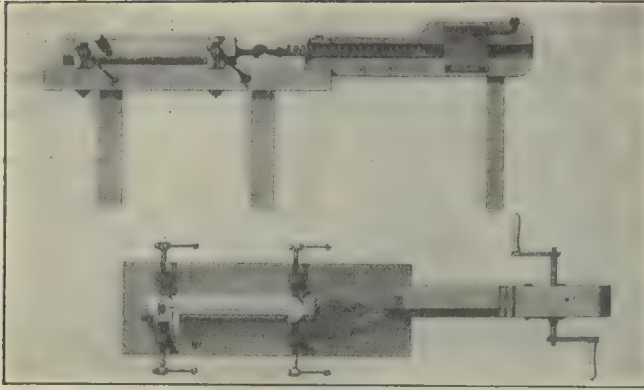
LEAD-PIPE-DRAWING MACHINE
